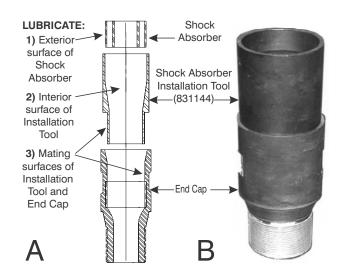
End Cap, Tool P/N 831144 and Shock Absorber
